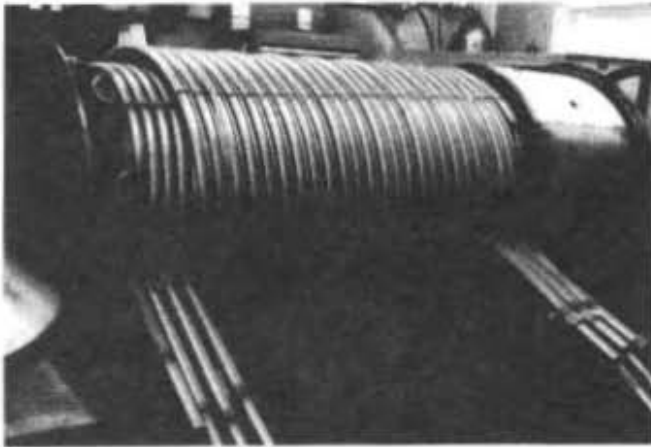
Interior view of a steam generator built by Steam Power Systems, Inc. Hot gases, produced in combustion chamber on right, pass through tube bundle. Tubing extensions shown are temporary, for hydrostatic proof testing (courtesy SPS, Inc.)
